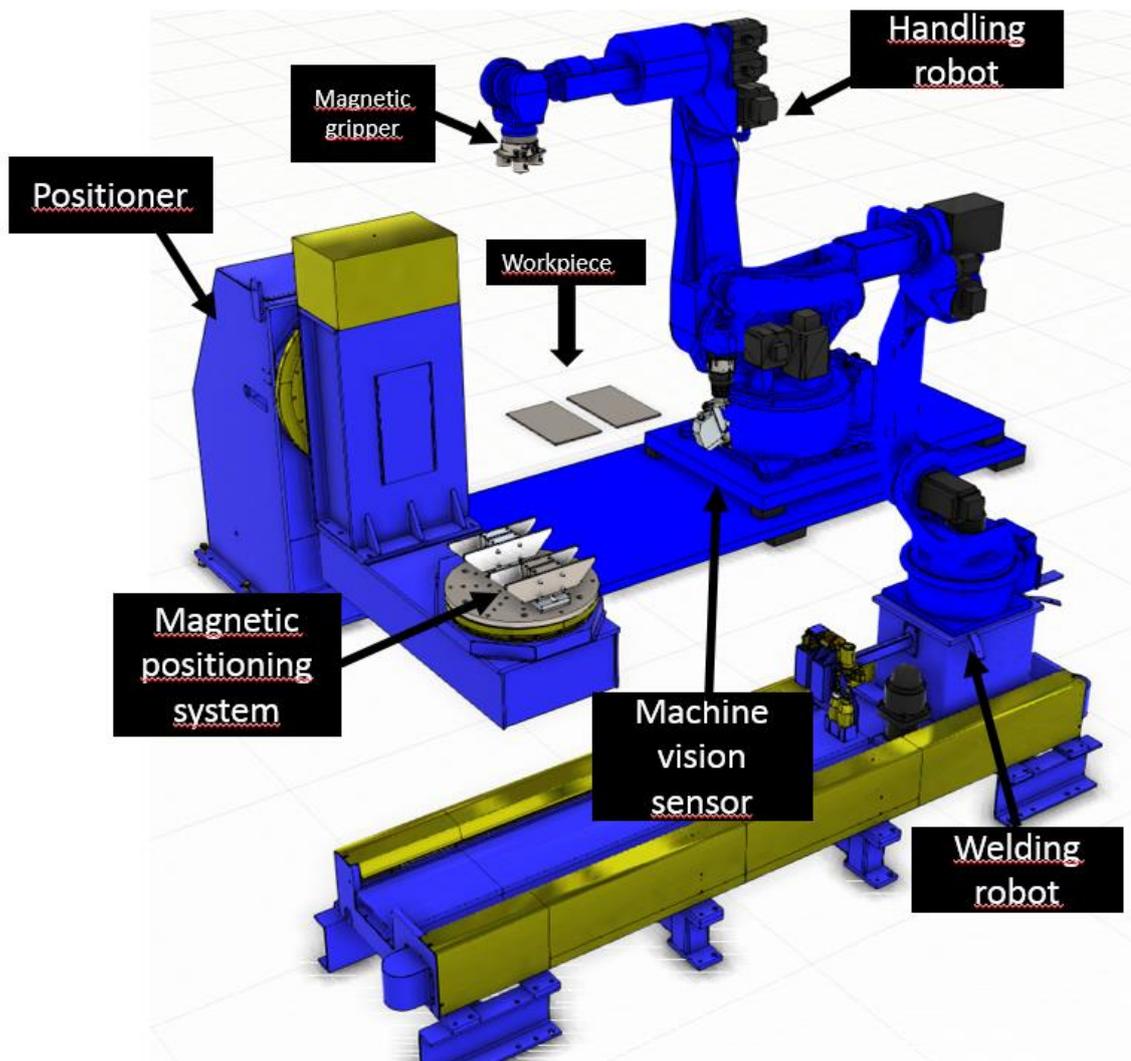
The simulation layout of multirobot jigless welding cell, the length of the cell is 4836 mm and the width is 3788 mm.
